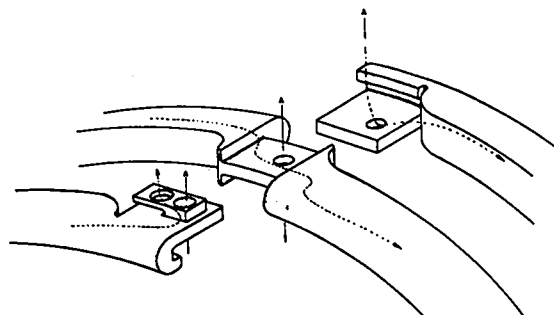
Exploded view at the cross-over of the two-turn coil. Current feed path is shown.
